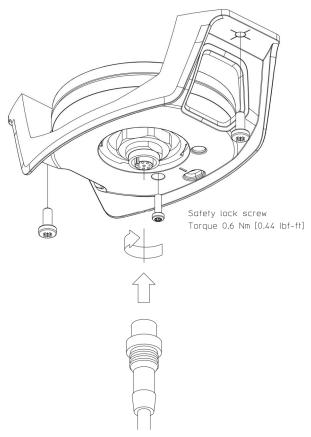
ROOF MOUNT INSTALLATION STEP 6 (FASTEN SCREWS AND CONNECT THE COMMUNICATION CABLE)
